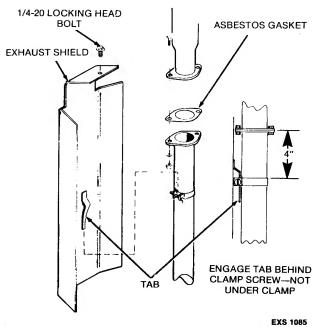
EXHAUST SHIELD TAB ENGAGEMENT
